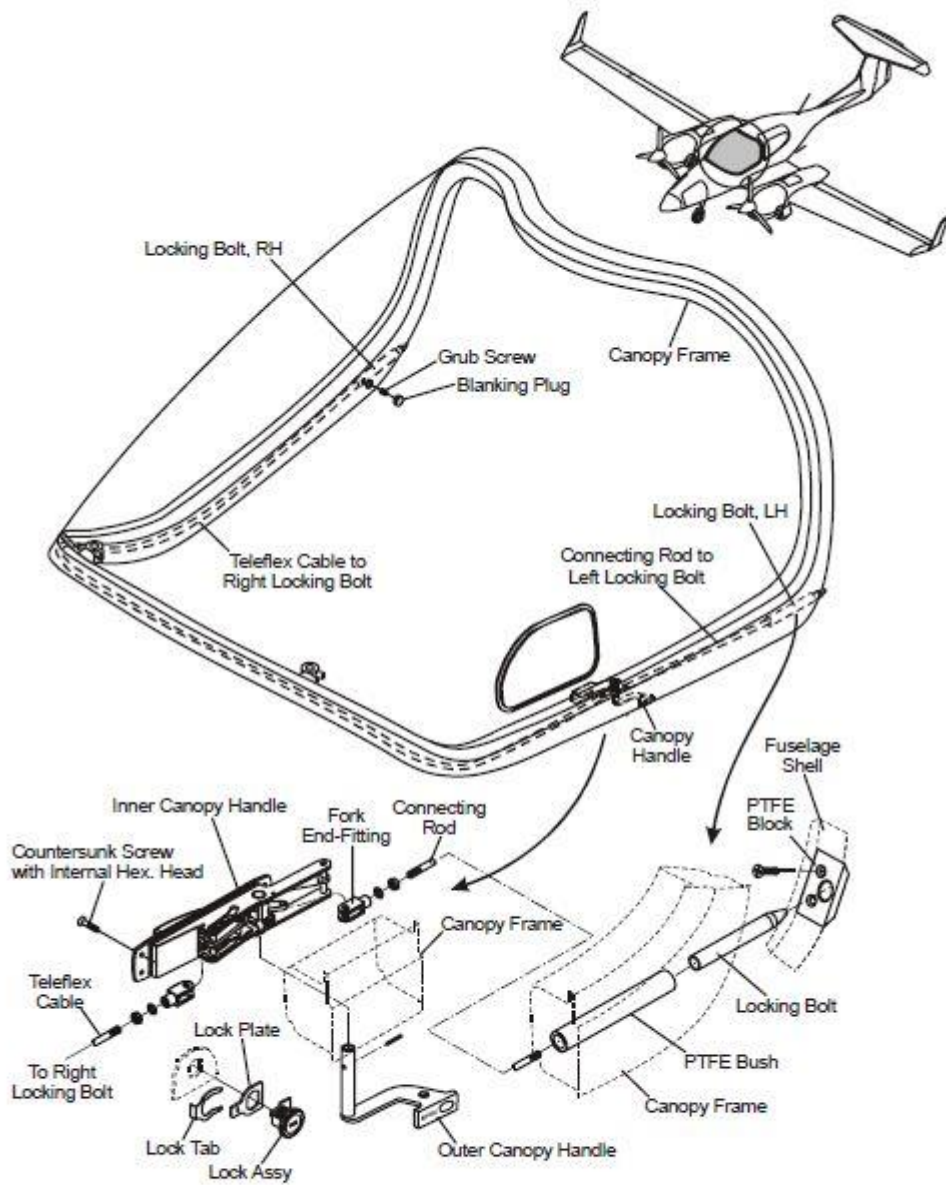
Canopy Locking Mechanism (MÄM 42-097 implemented)
